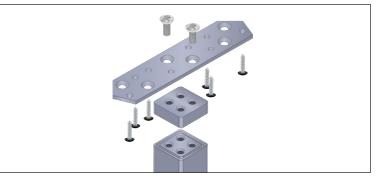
Figure AT. Attach the spacing block to the post before attaching the top mounting plate.
